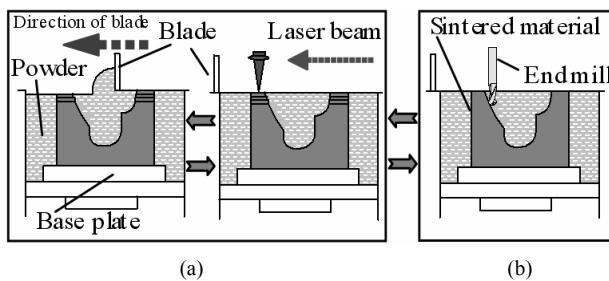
Concept of milling-combined laser sintering system (MLSS) (a) forming layers and (b) high speed milling.
